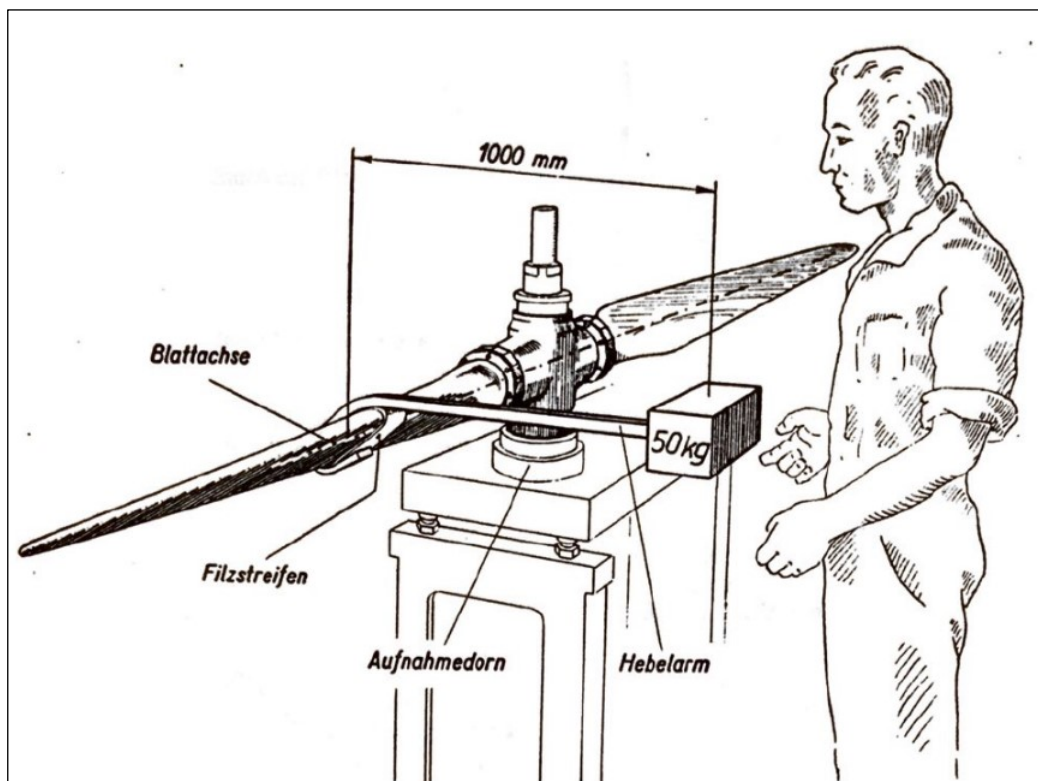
Checking the blade's frictional resistance. Source: "Junkers Metall-Luftschrauben" (Junkers metal propellers).
